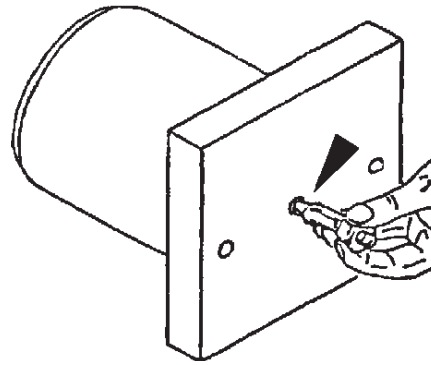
Install Grease Fitting into Hydraulic Tensioner.
